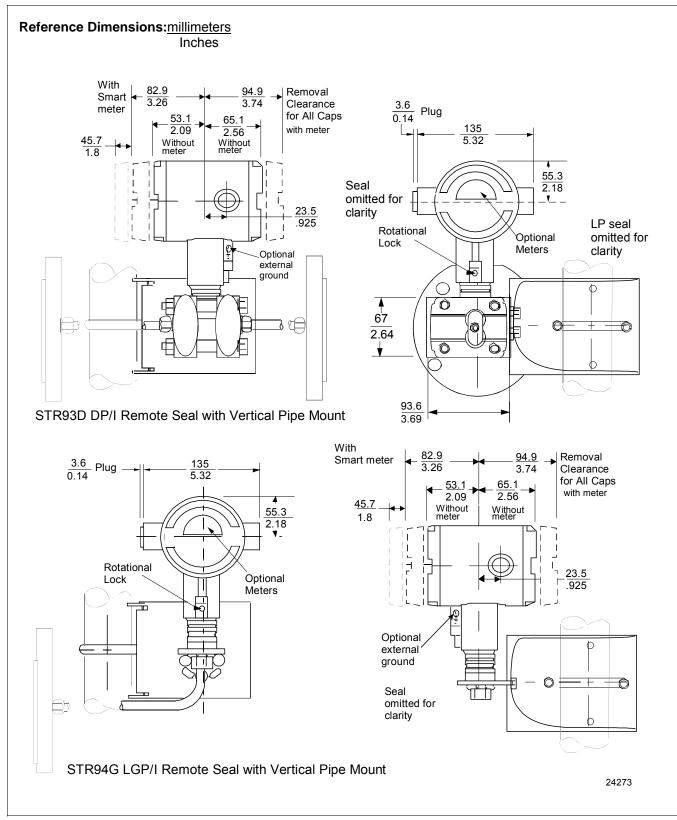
Approximate vertical mounting dimensions for Remote Seal Transmitter
